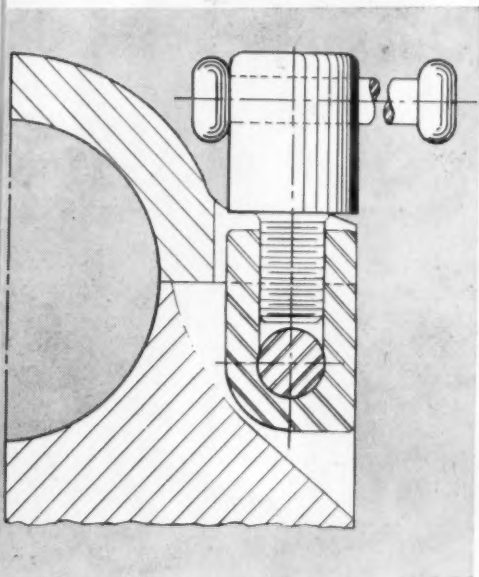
Swinging clamp of the cap type in which the cap is clamped by means of a screw and a swinging pivot block.
